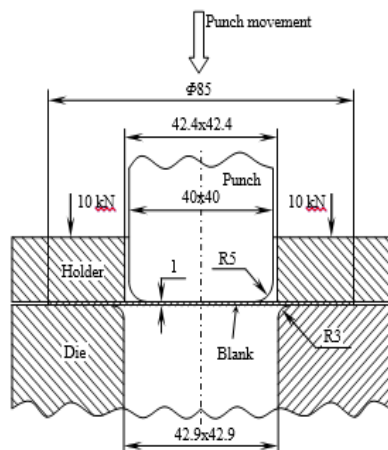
Diagram of the tooling setup in square cup drawing (unit: mm) [19]
